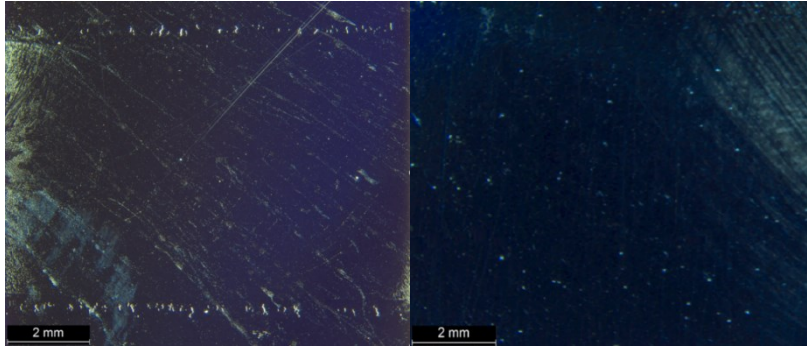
Images at welding surface of PVR specimen F (left) and at depth of 0.5mm (right).
